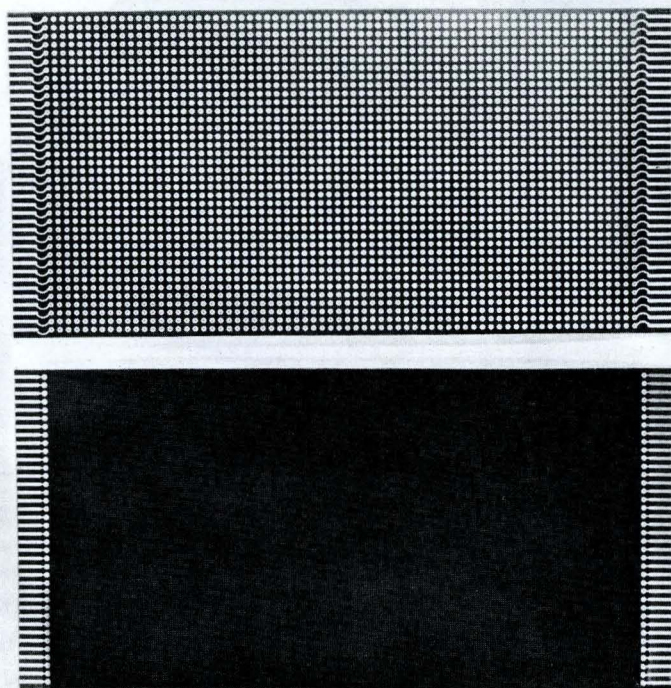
Front and rear view of the experimenter's printed-wiring board.
